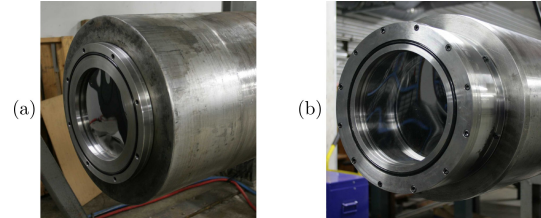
(a) Secondary diaphragm holder; (b) Tertiary diaphragm holder and mechanical buffer assembly.
